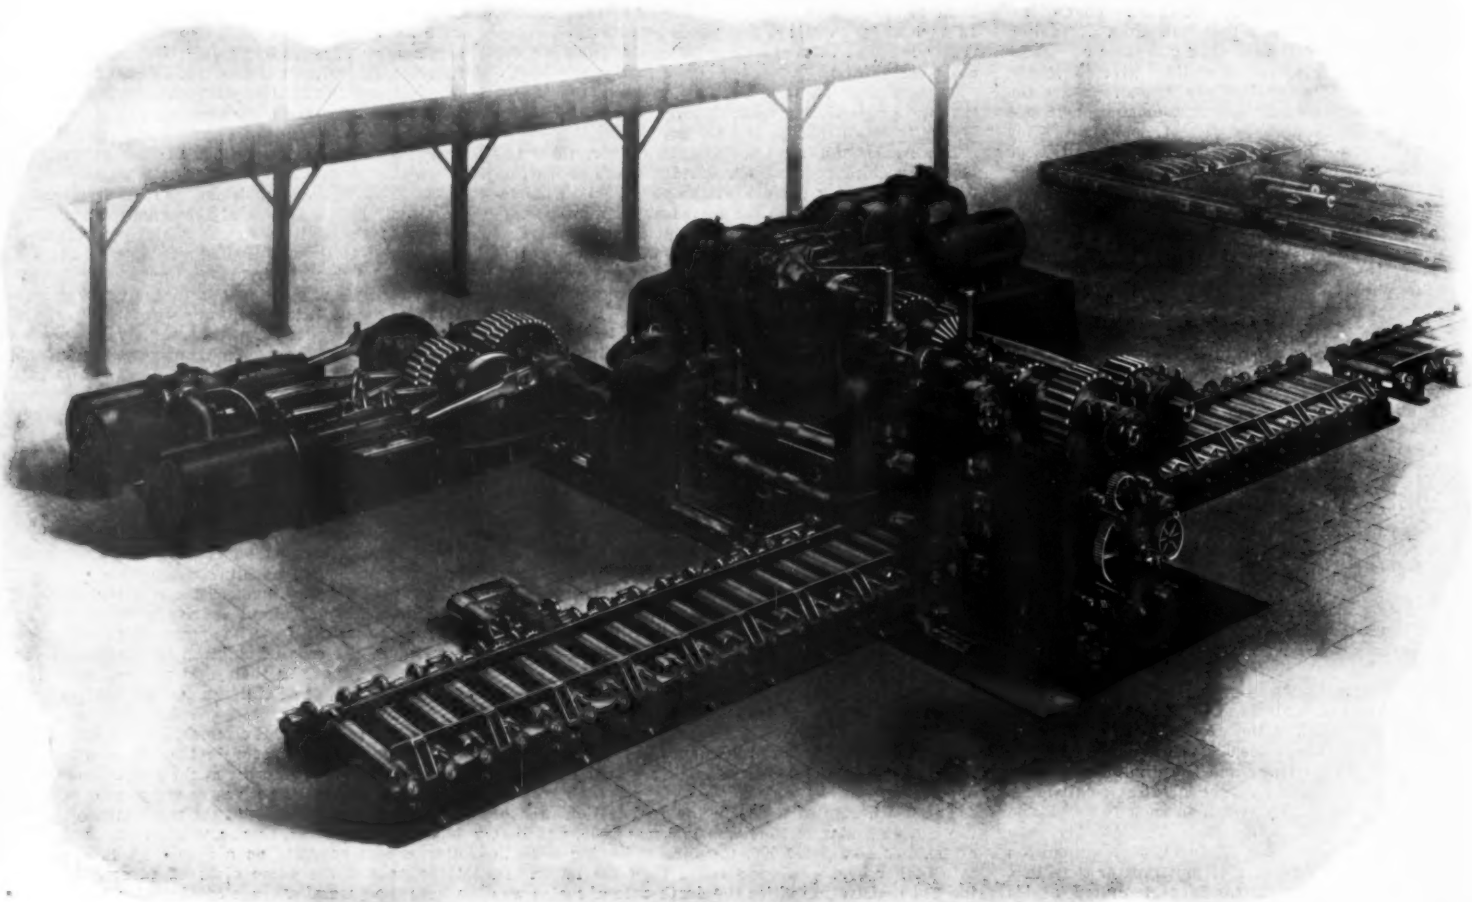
THE 40-INCH SLABBING MILL COMPLETE, WITH TWO 40 X 60-INCH ENGINES DRIVING THE HORIZONTAL ROLLS AND TWO 36 X 48-INCH ENGINES DRIVING THE VERTICAL ROLLS.
